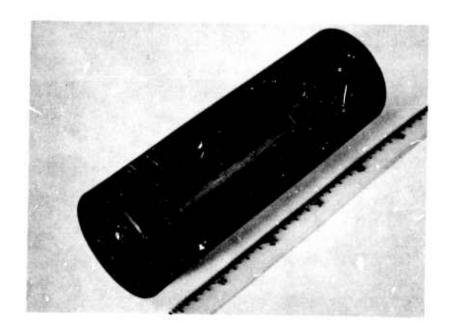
Ruby boule fabricated to a uniform diameter of 1-3/4 inches.
